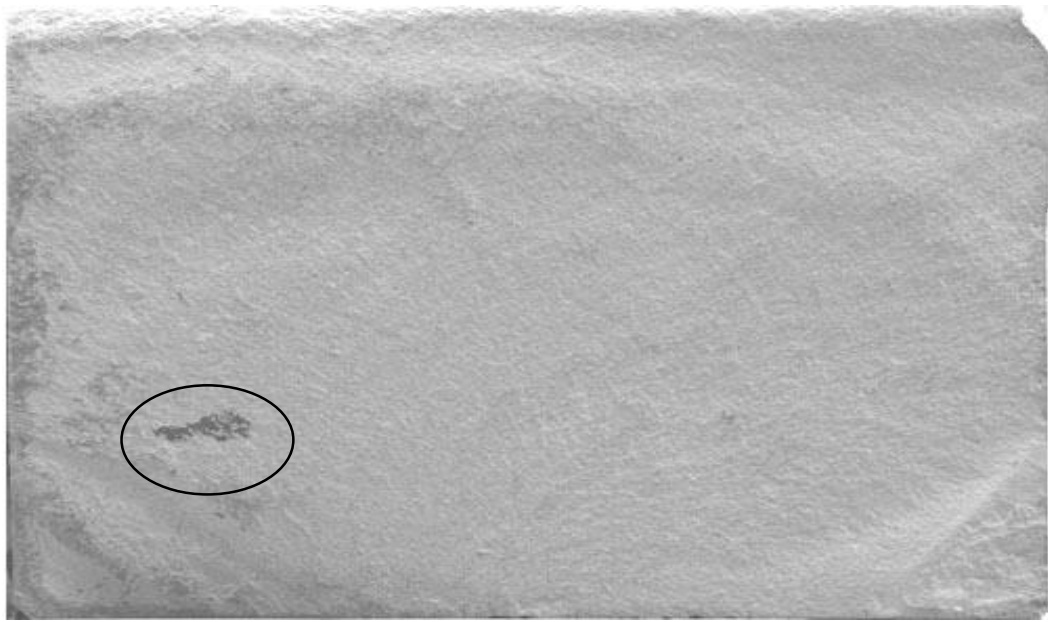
Bar 1, fracture surface end faces, composite (200× magnification)
